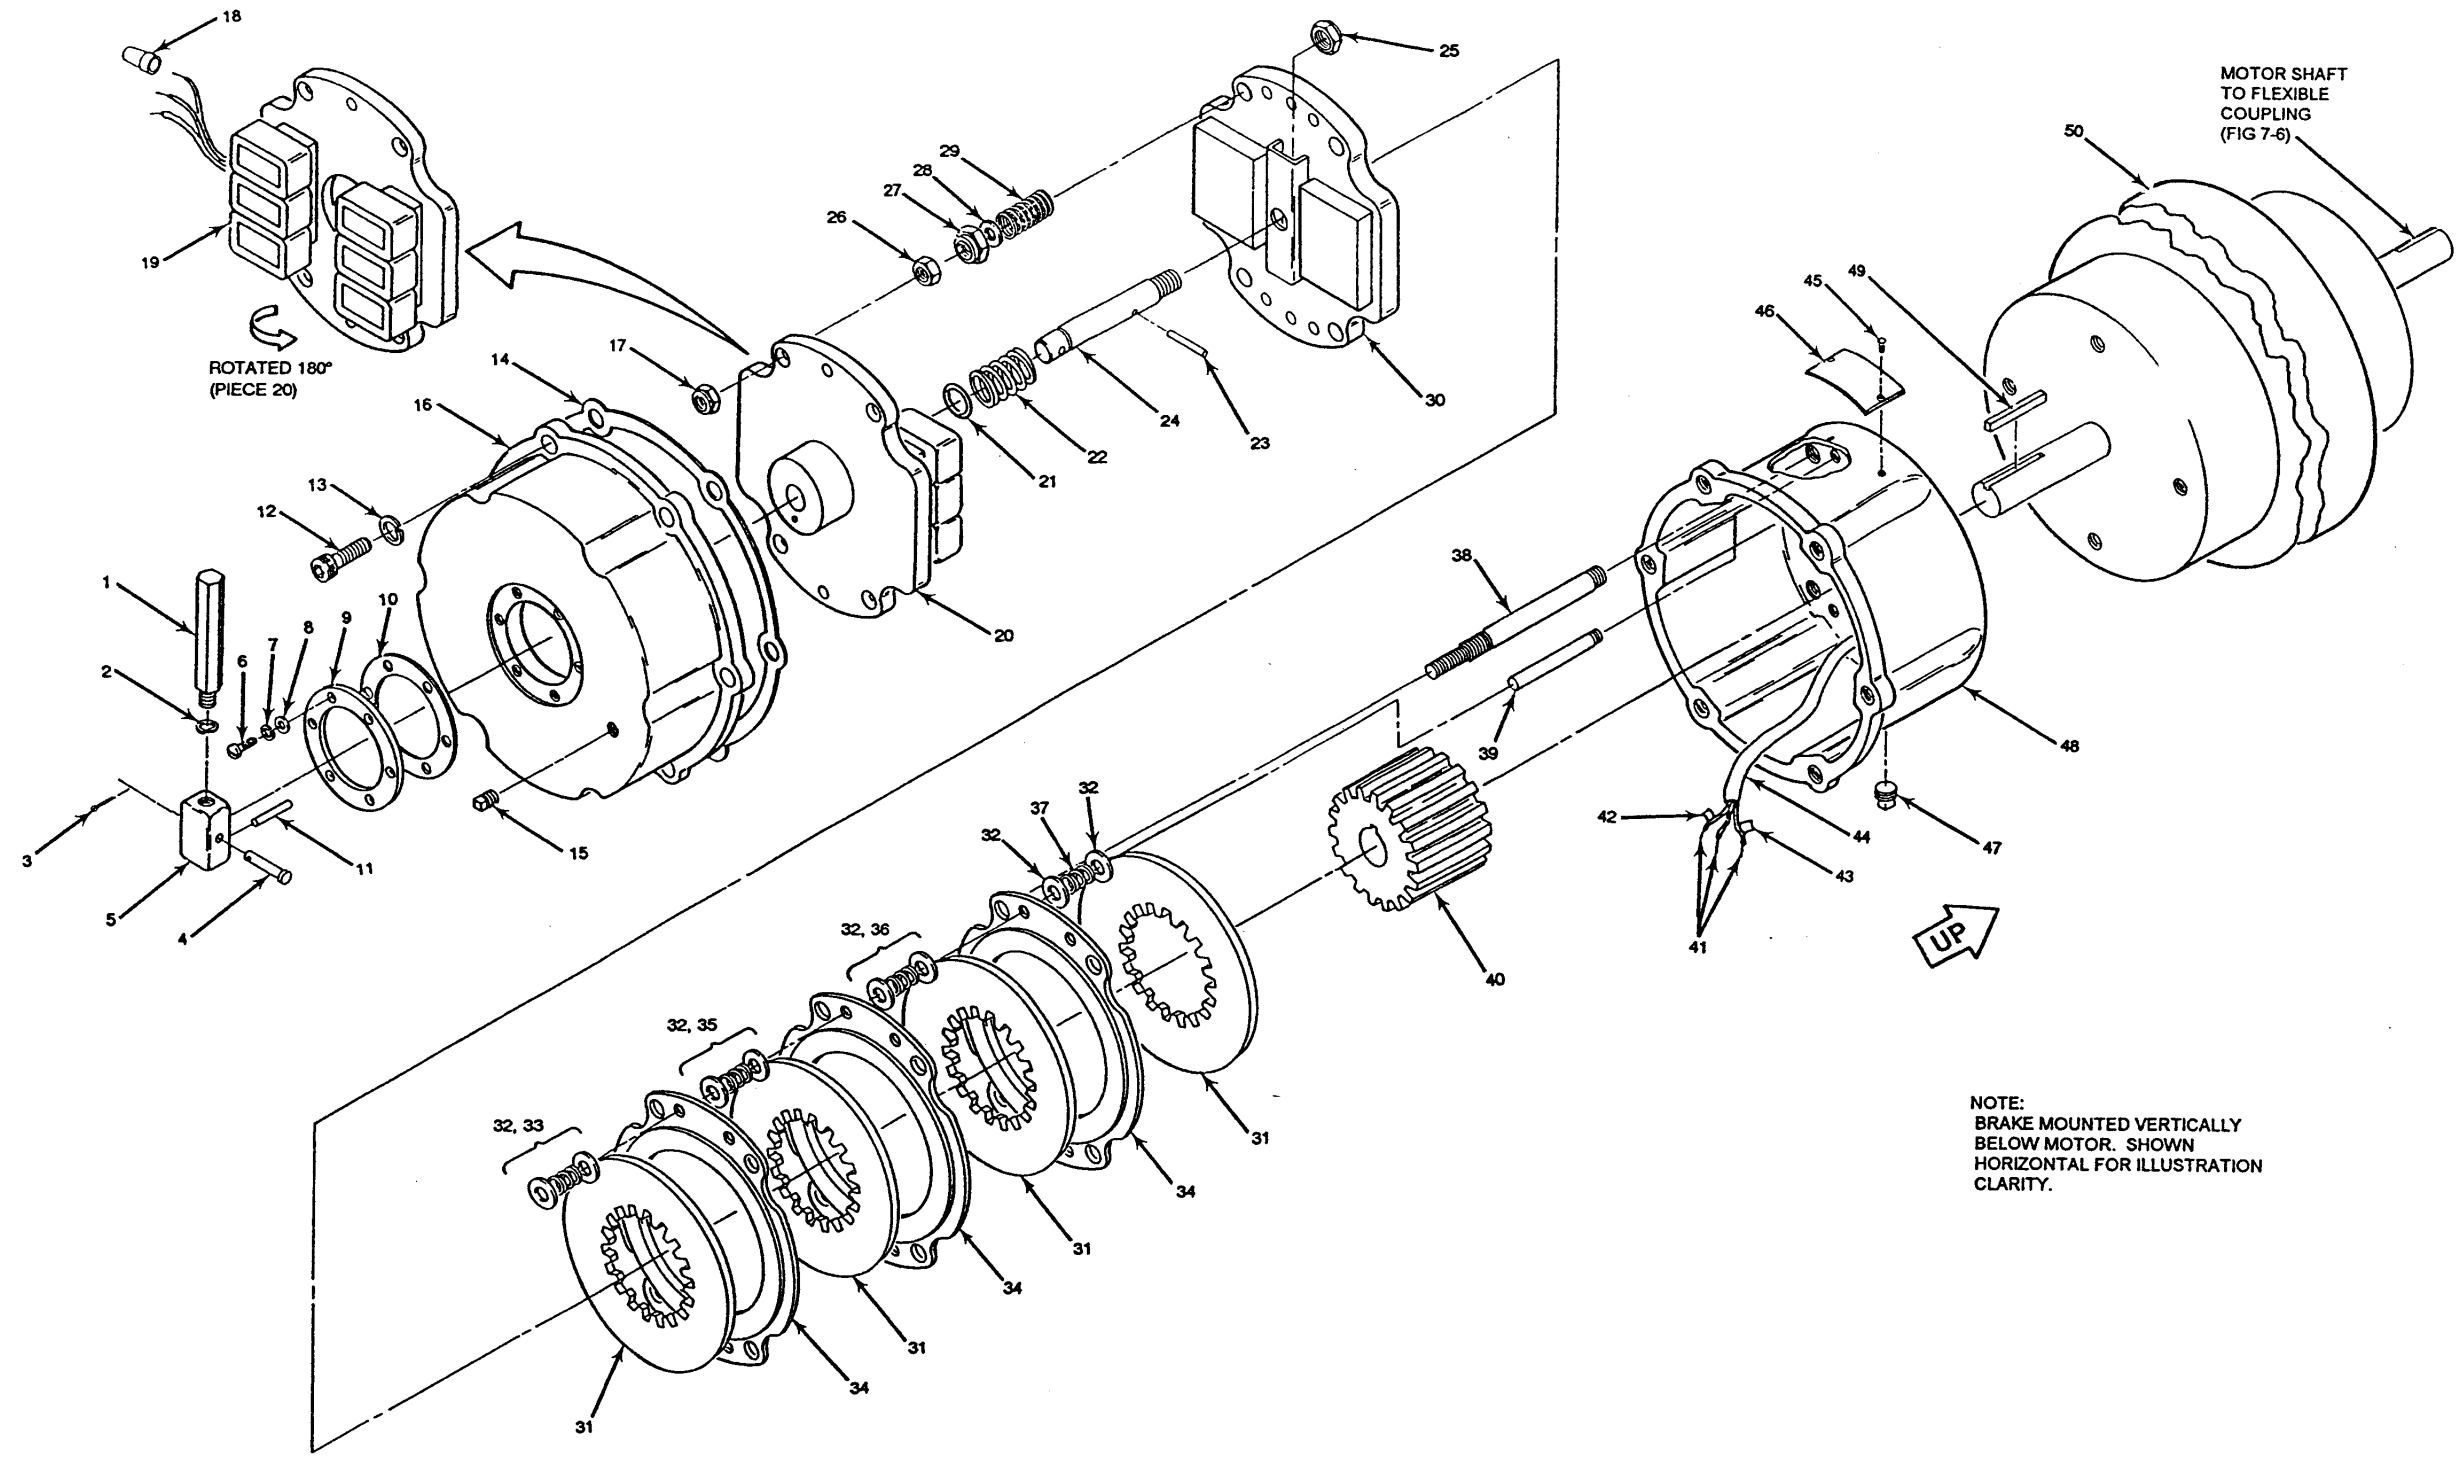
AG Motor and Electric Disc Brake Assembly
